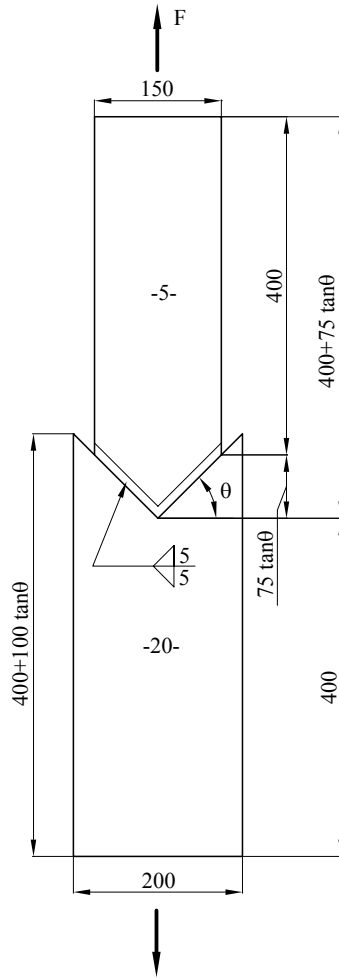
Geometry of the fillet-welded connection.
